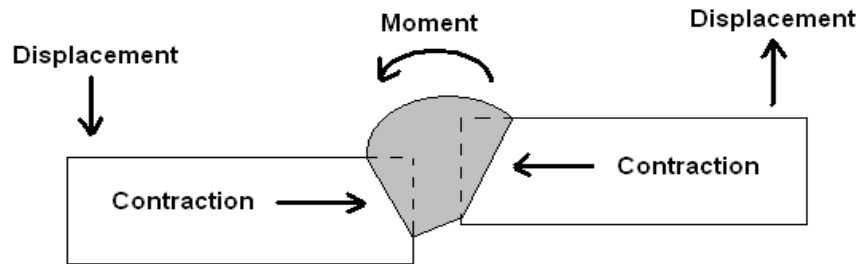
Welding distortion theory due to plate misalignment.
